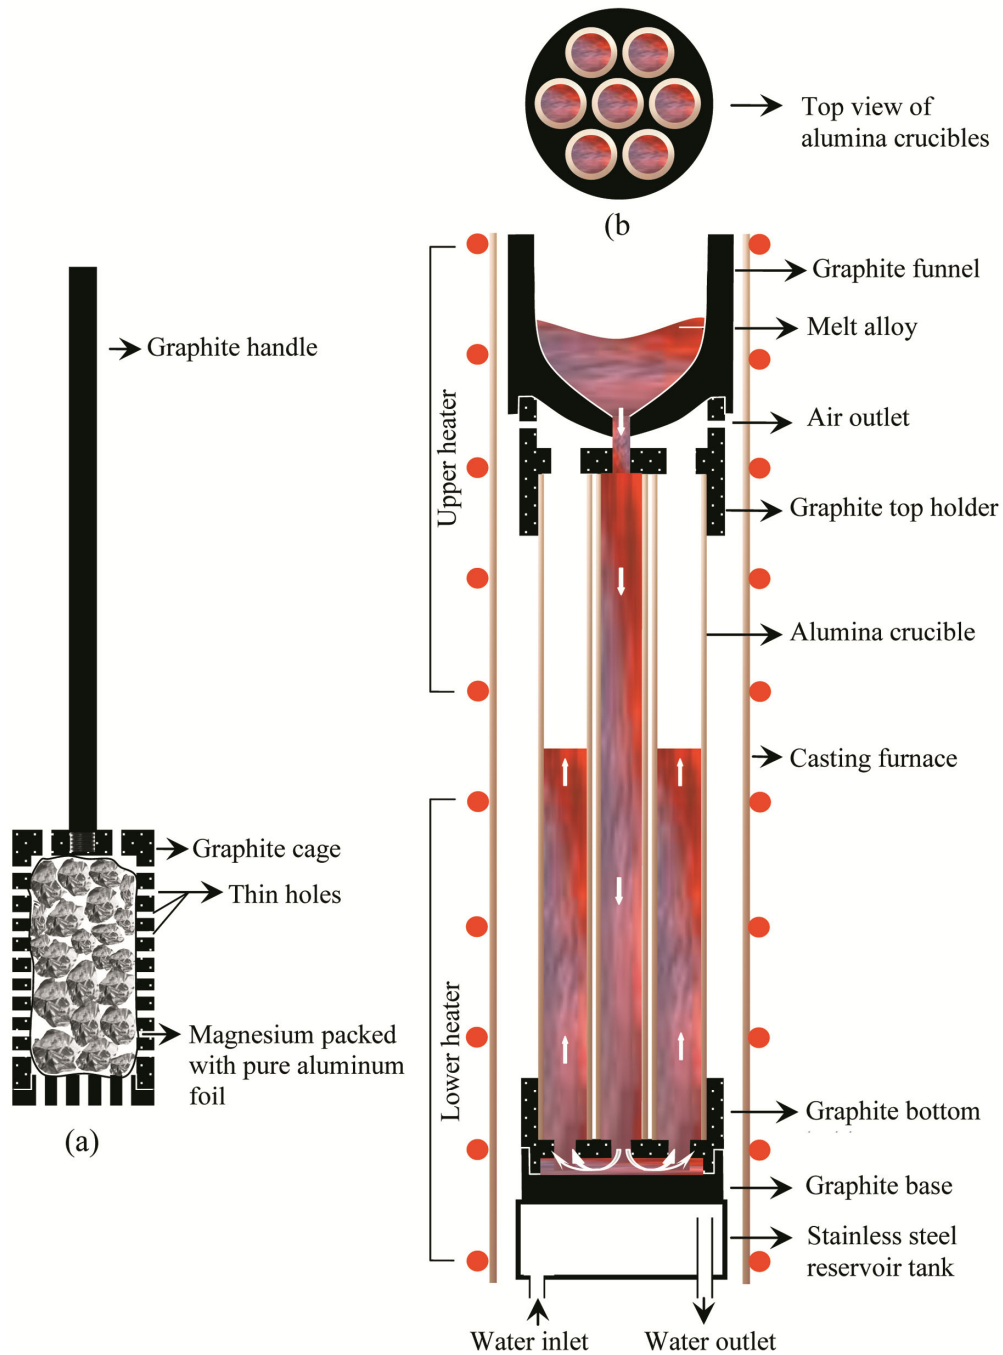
(a) Graphite cage and holder, (b) Top view of alumina crucibles, and (c) the casting furnace.
